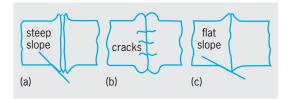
Flash-weld quality indicated on the surface. (a) Satisfactory heat and upset. (b) Cracks caused by insufficient heat. (c) Insufficient heat or upset force, or both. (After A. L. Phillips, ed., Welding Handbook, 4th ed., American Welding Society, 1957)
